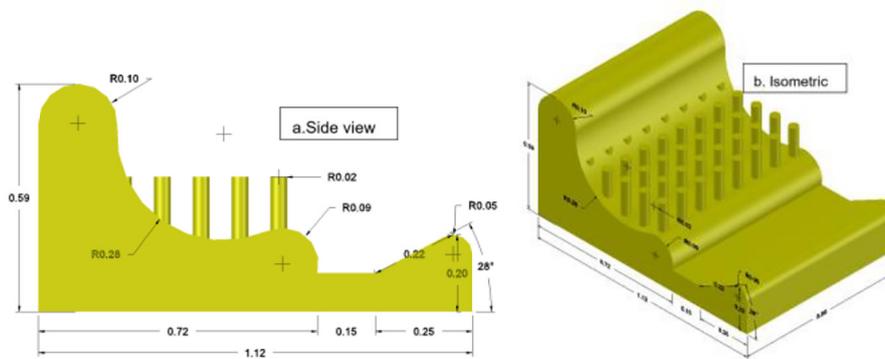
Geometrical shape of SU3: (a) side view, (b) isometric
